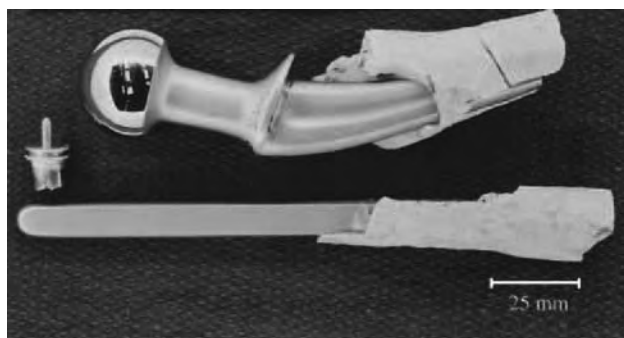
Photograph showing pieces of Co-Cr hip prosthesis.
